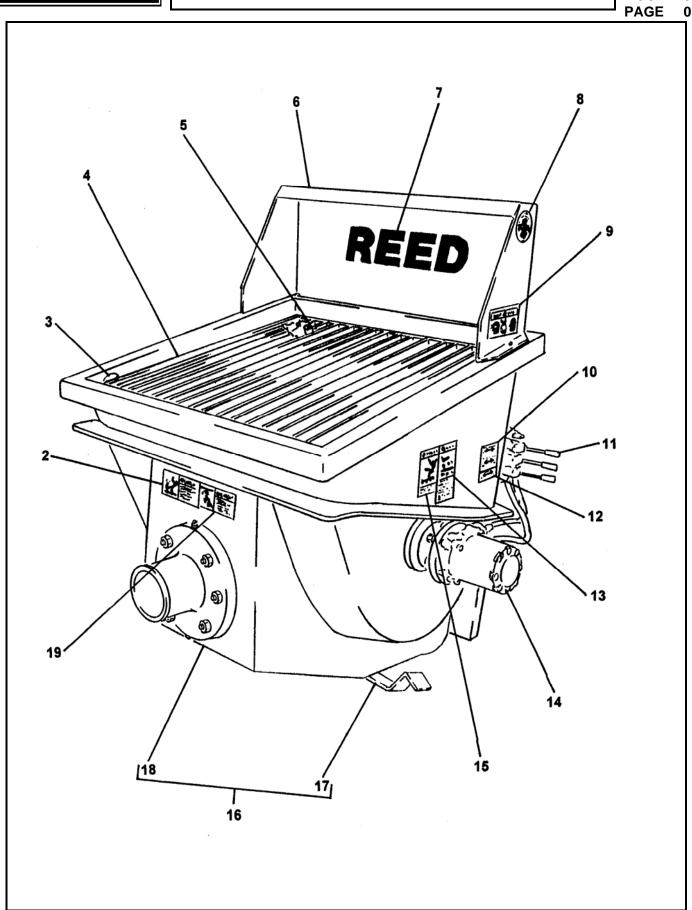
HARSH MIX HOPPER AGITATOR MOTOR ASSEMBLY
